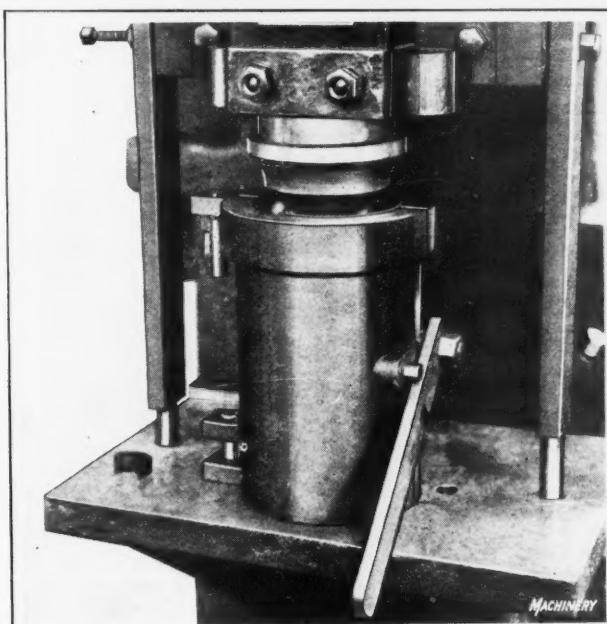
Press equipped for Flanging Operation on Inner Cylinders
